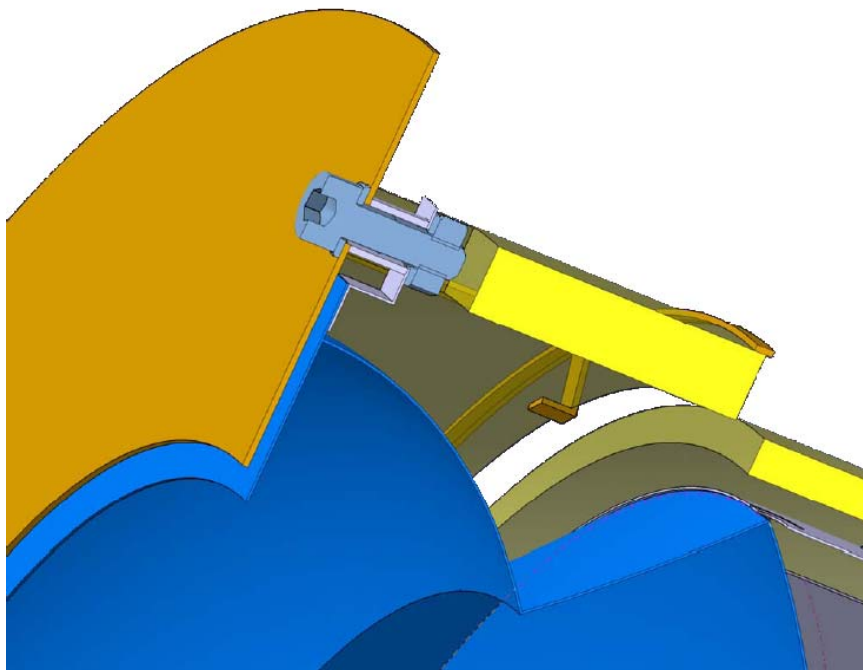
Filter mount, filter and BSP mounting ring – CAD model
